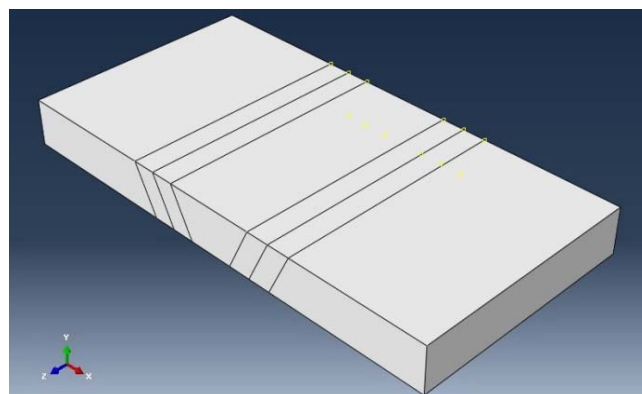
3D model of a FSW welded joint (taken from /7/).
